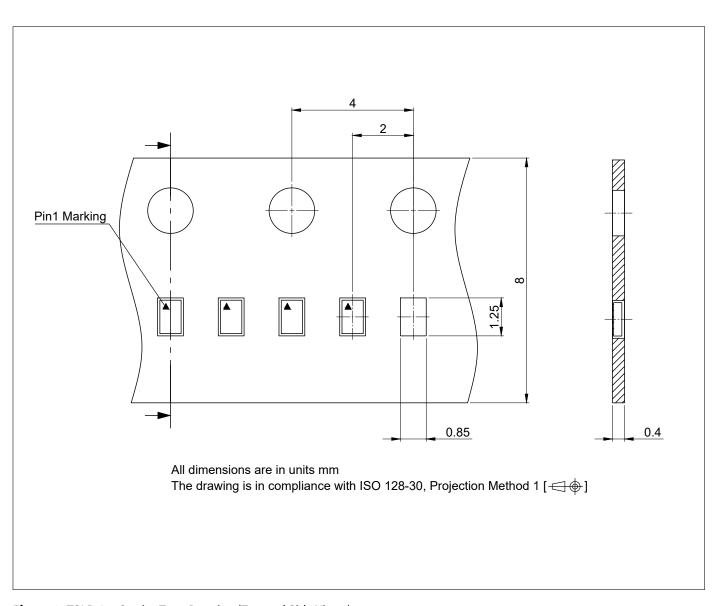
TSLP-6-4 Carrier Tape Drawing (Top and Side Views)
